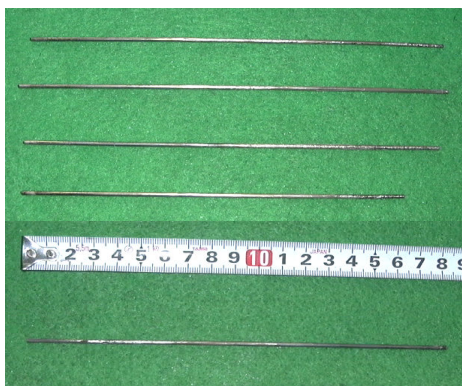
U-7wt.%Mo fuel pins produced by the injection casting method.
